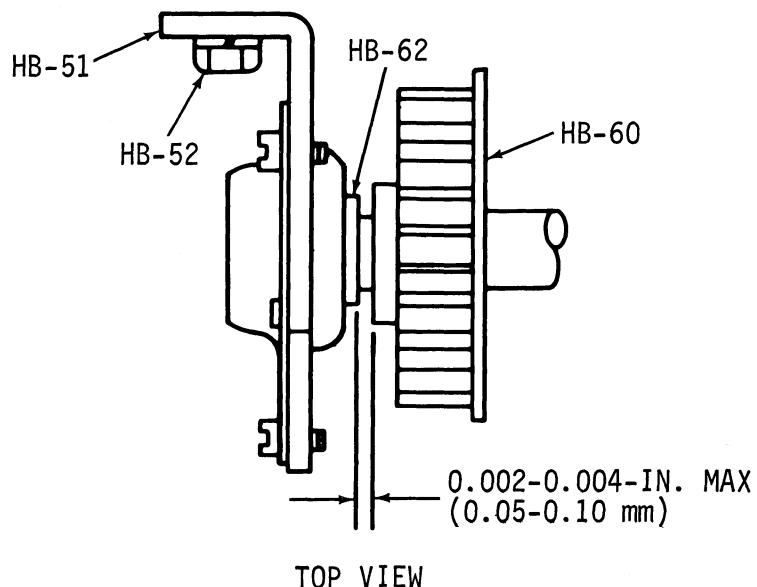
A. BUSHING END-PLAY ADJUSTMENT FOR PRELOAD CLUTCH SHAFT (HB-50)
